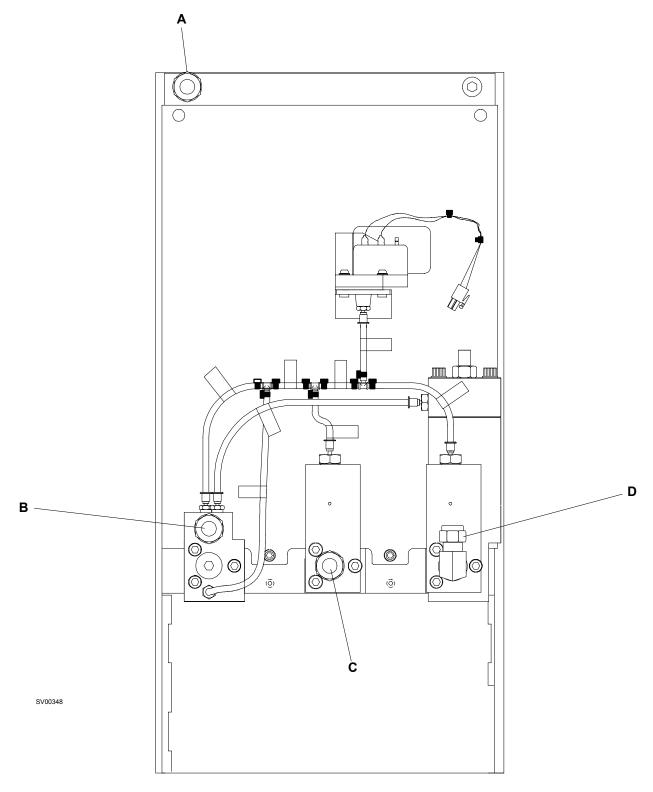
A. Tubing Connections: Flowmeter Sub-assembly
